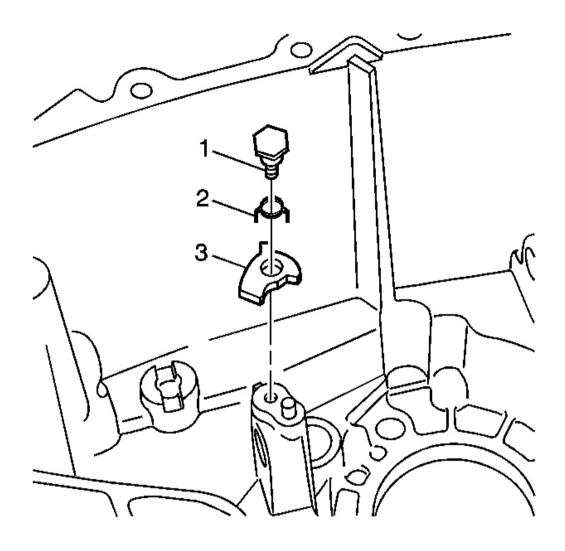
Bolt, Lever, Spring & Transmission Housing Courtesy of GENERAL MOTORS CORP.
